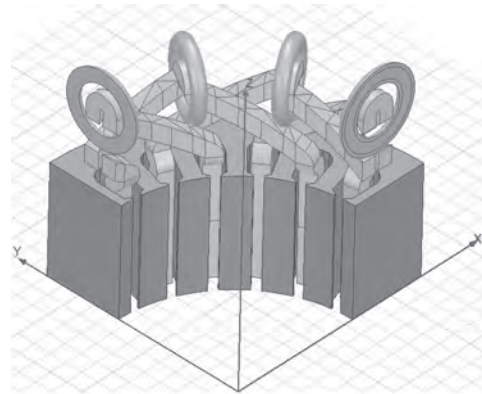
Stator windings end zone geometry of one pole part of the machine illustrating the additional magnetic circuits positioning.
